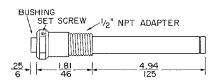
Part No. WEL14A-600R bulb well for liquid immersion applications where the temperature bulb may be removed without draining the tank.
